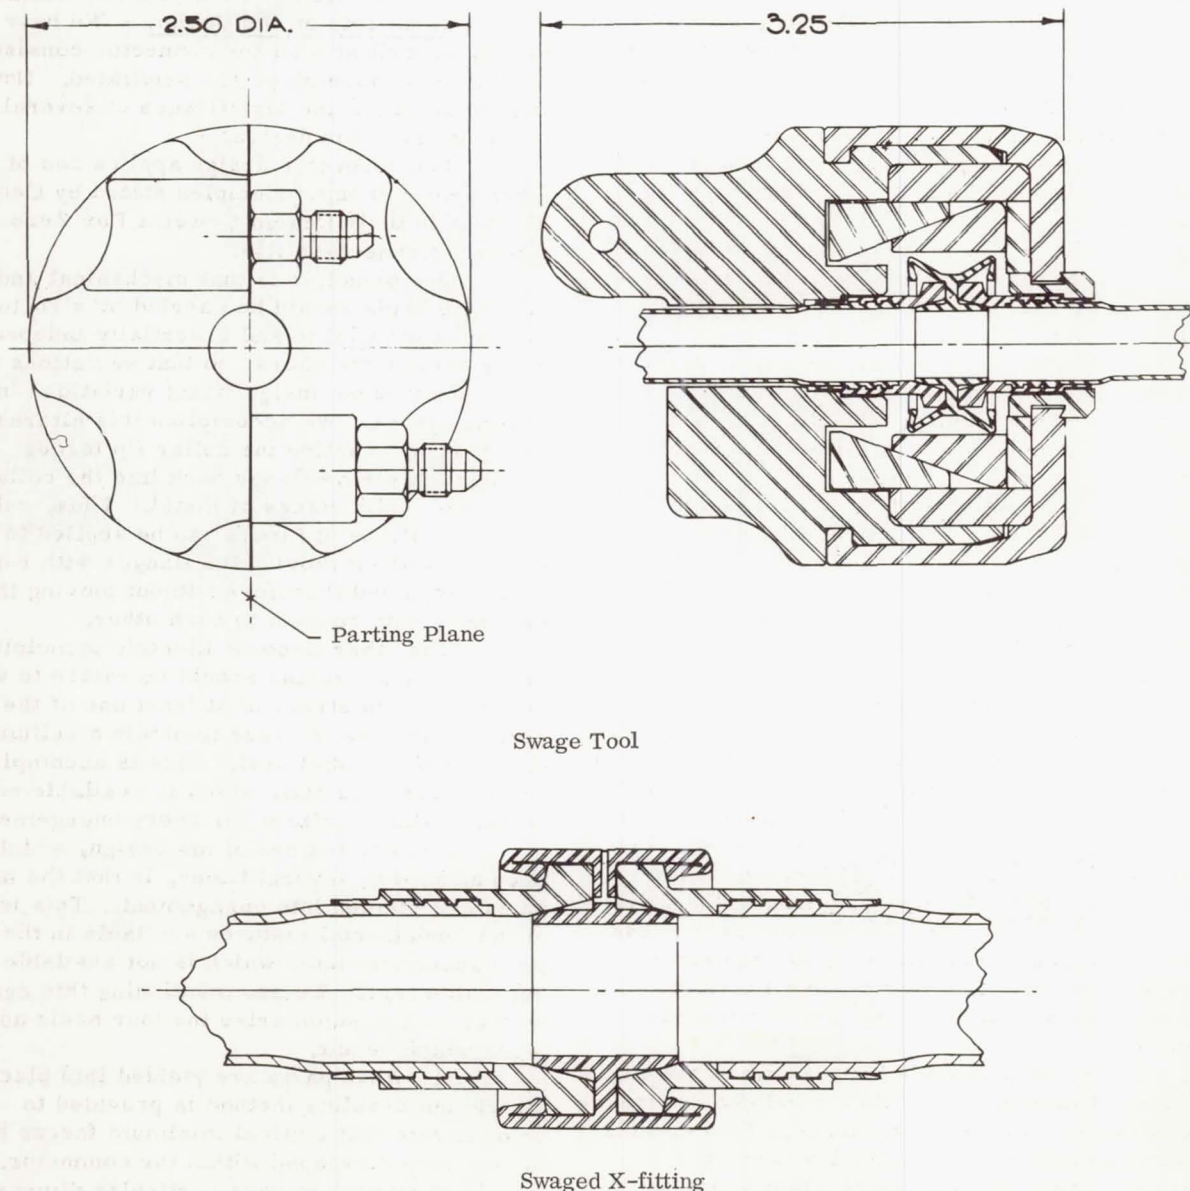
Collar swaging tool showing assembly of union and a completed connection
